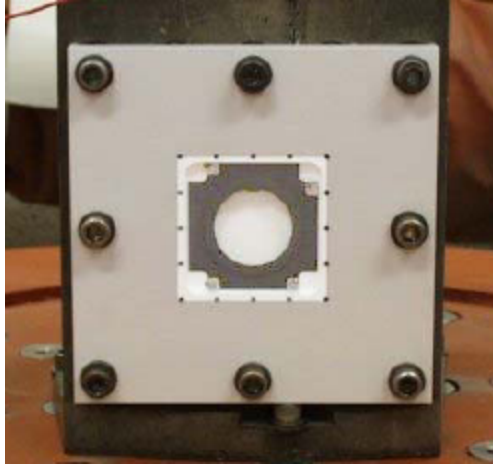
COATED FIELD STOP MOUNTED IN FIXTURE (COVER REMOVED).
